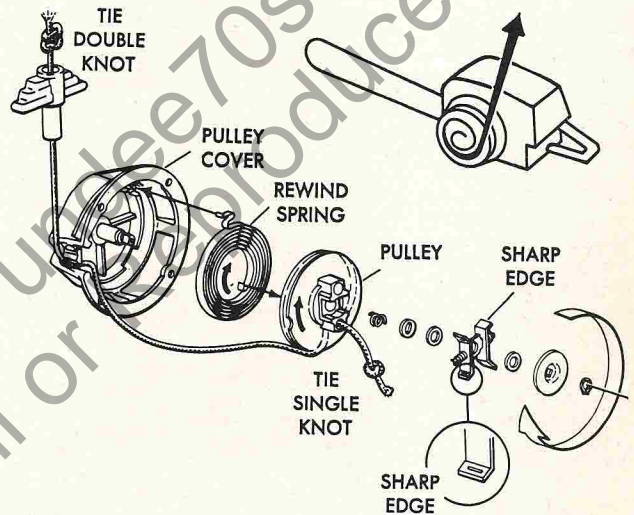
B—Proper assembly of Fairbanks-Morse recoil starter for counter-clockwise pull. Used on some models.
